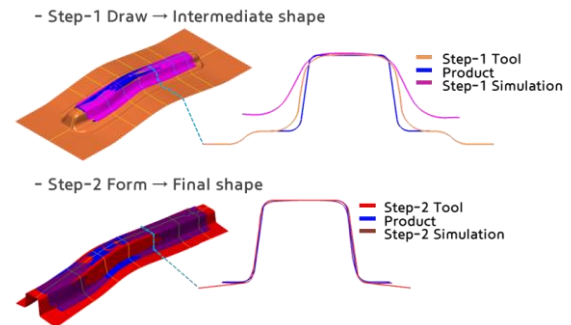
Sheet metal forming process for securing the formability and dimensional accuracy of the front side rear lower member
